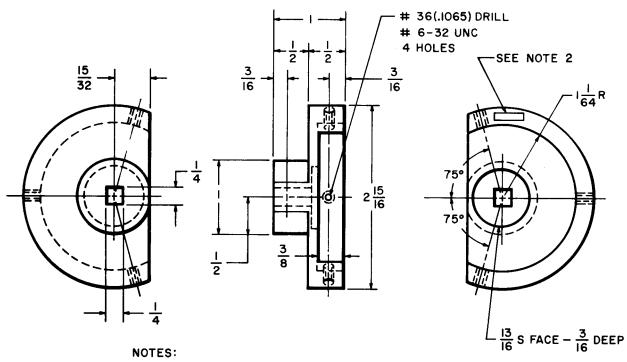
Turret Installation/Removal Fixture (Sheet 2 of 2)
